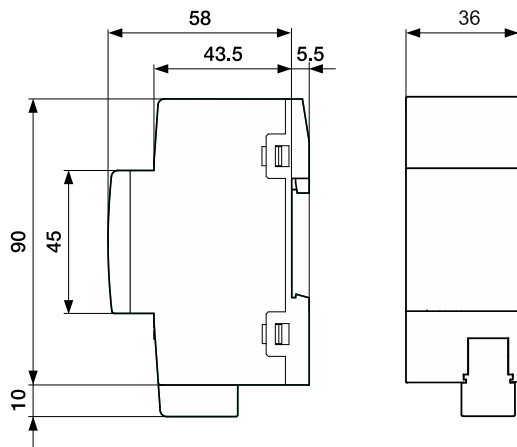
Dimensions BI-M-4.20.1.11 / BI-M-4.230.1.11 (all dimensions are in mm)
